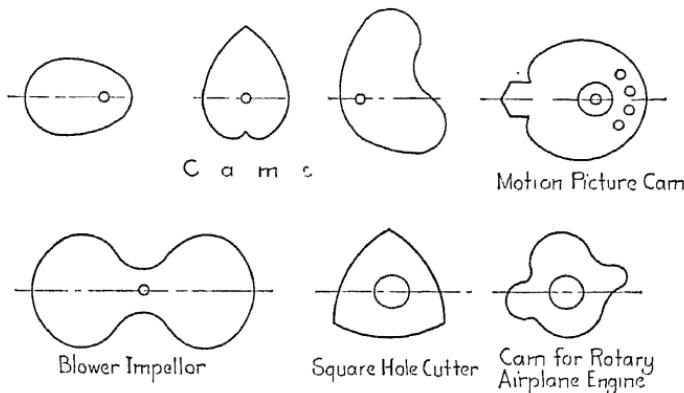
Problem 62. Suggested outlines to be generated by shaper cutters.
